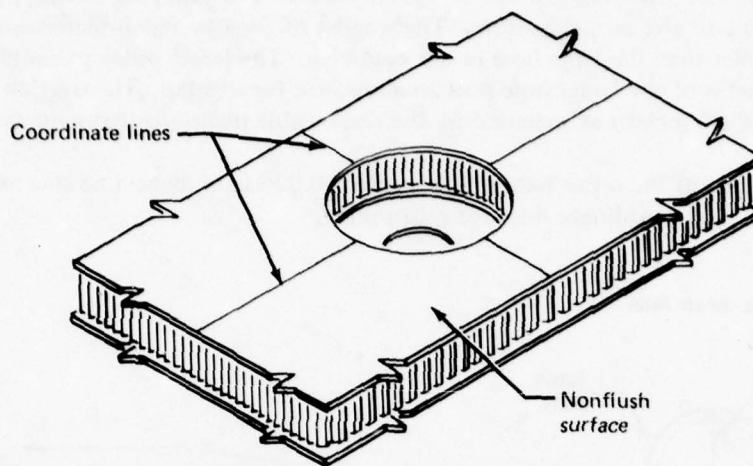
Cavity Cleaned for Installation of Honeycomb Core Plug Repair Details
